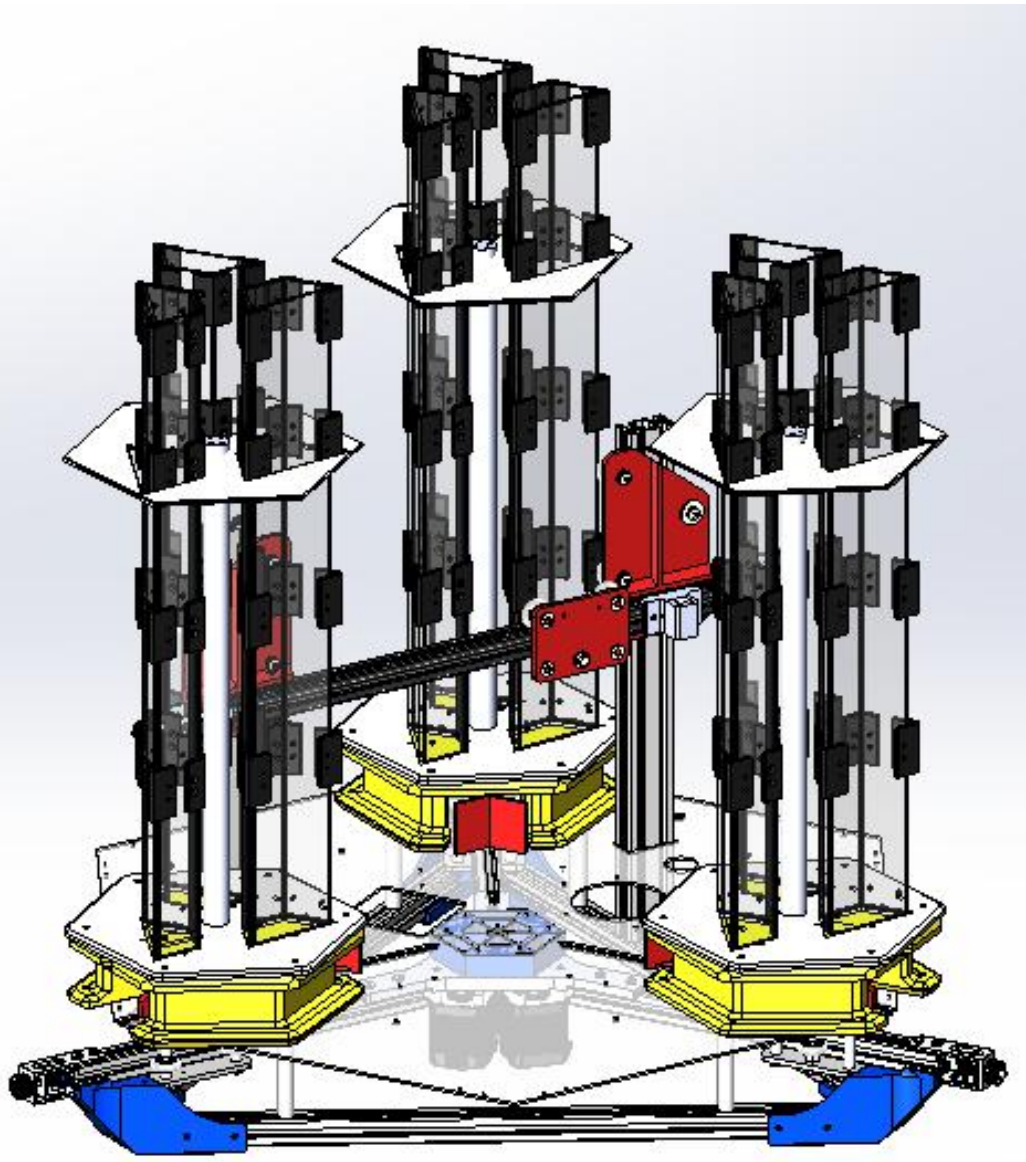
Body Magazine Main Assembly with Gripper Rail
